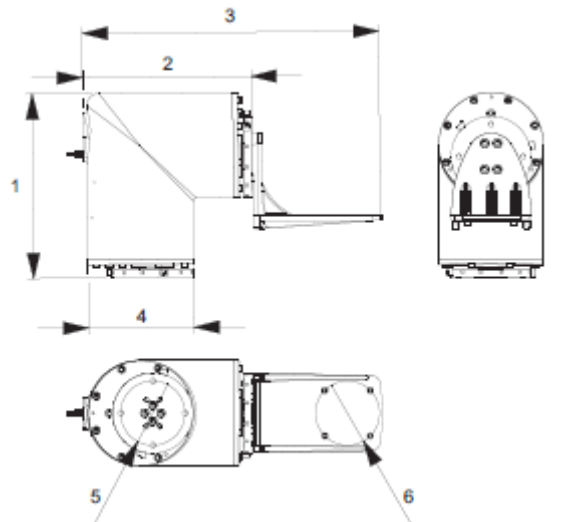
Pan-and-tilt unit – Mechanical dimensions
